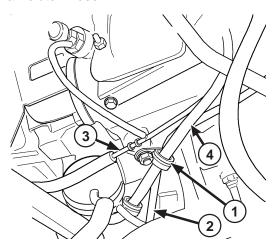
Fuel Line and Wiring Harness Clamp Removal
